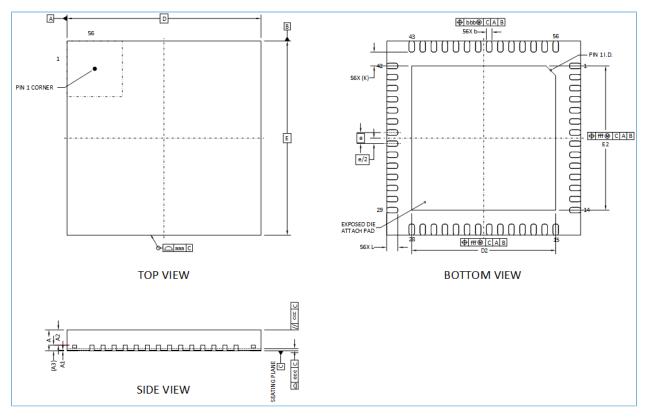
GR5515IGND/GR5515I0ND QFN56 package outlines
